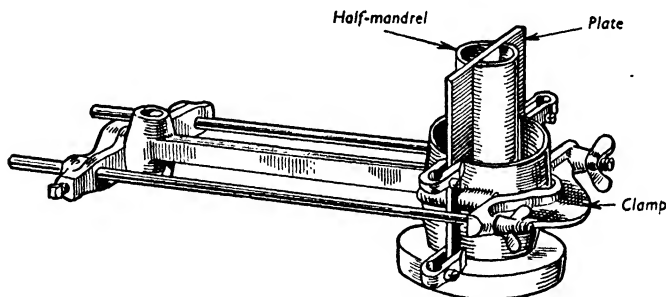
TYPICAL CONNECTING ROD REMETALLING JIG
